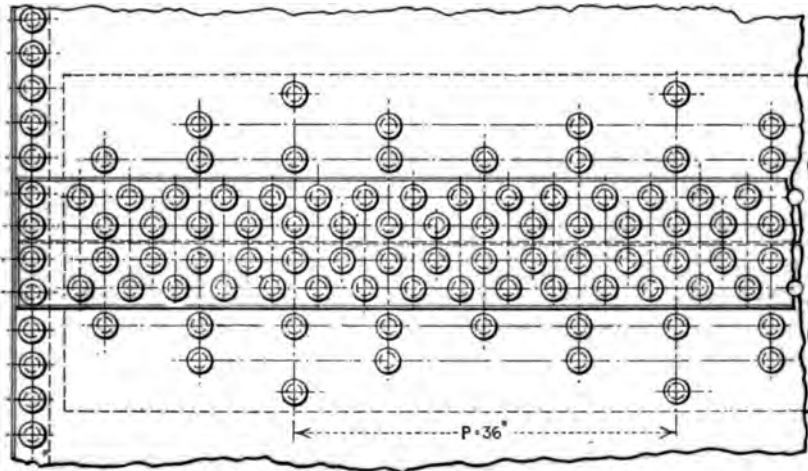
EXAMPLE OF BUTT AND DOUBLE STRAP JOINT, QUINTUPLE-RIVETED
